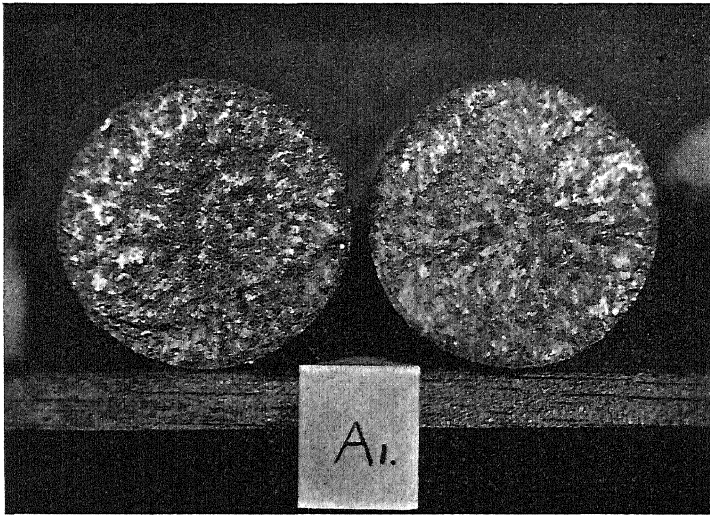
CAST-IRON TEST PLUG, SHOWING LOW-MOTTLED AND MOTTLED FRACTURES.
